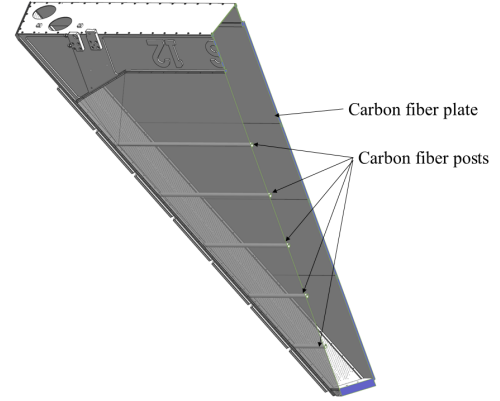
Assembly drawing of a R3 chamber showing the component parts and highlighting the carbon-fiber tubes at the entrance face and the carbon-foam composite plate at the exit, which supported the endplates against the wire tension.
